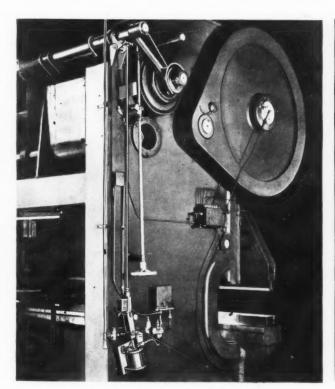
Air-electric Control Equipment Mounted on Steelweld Press
